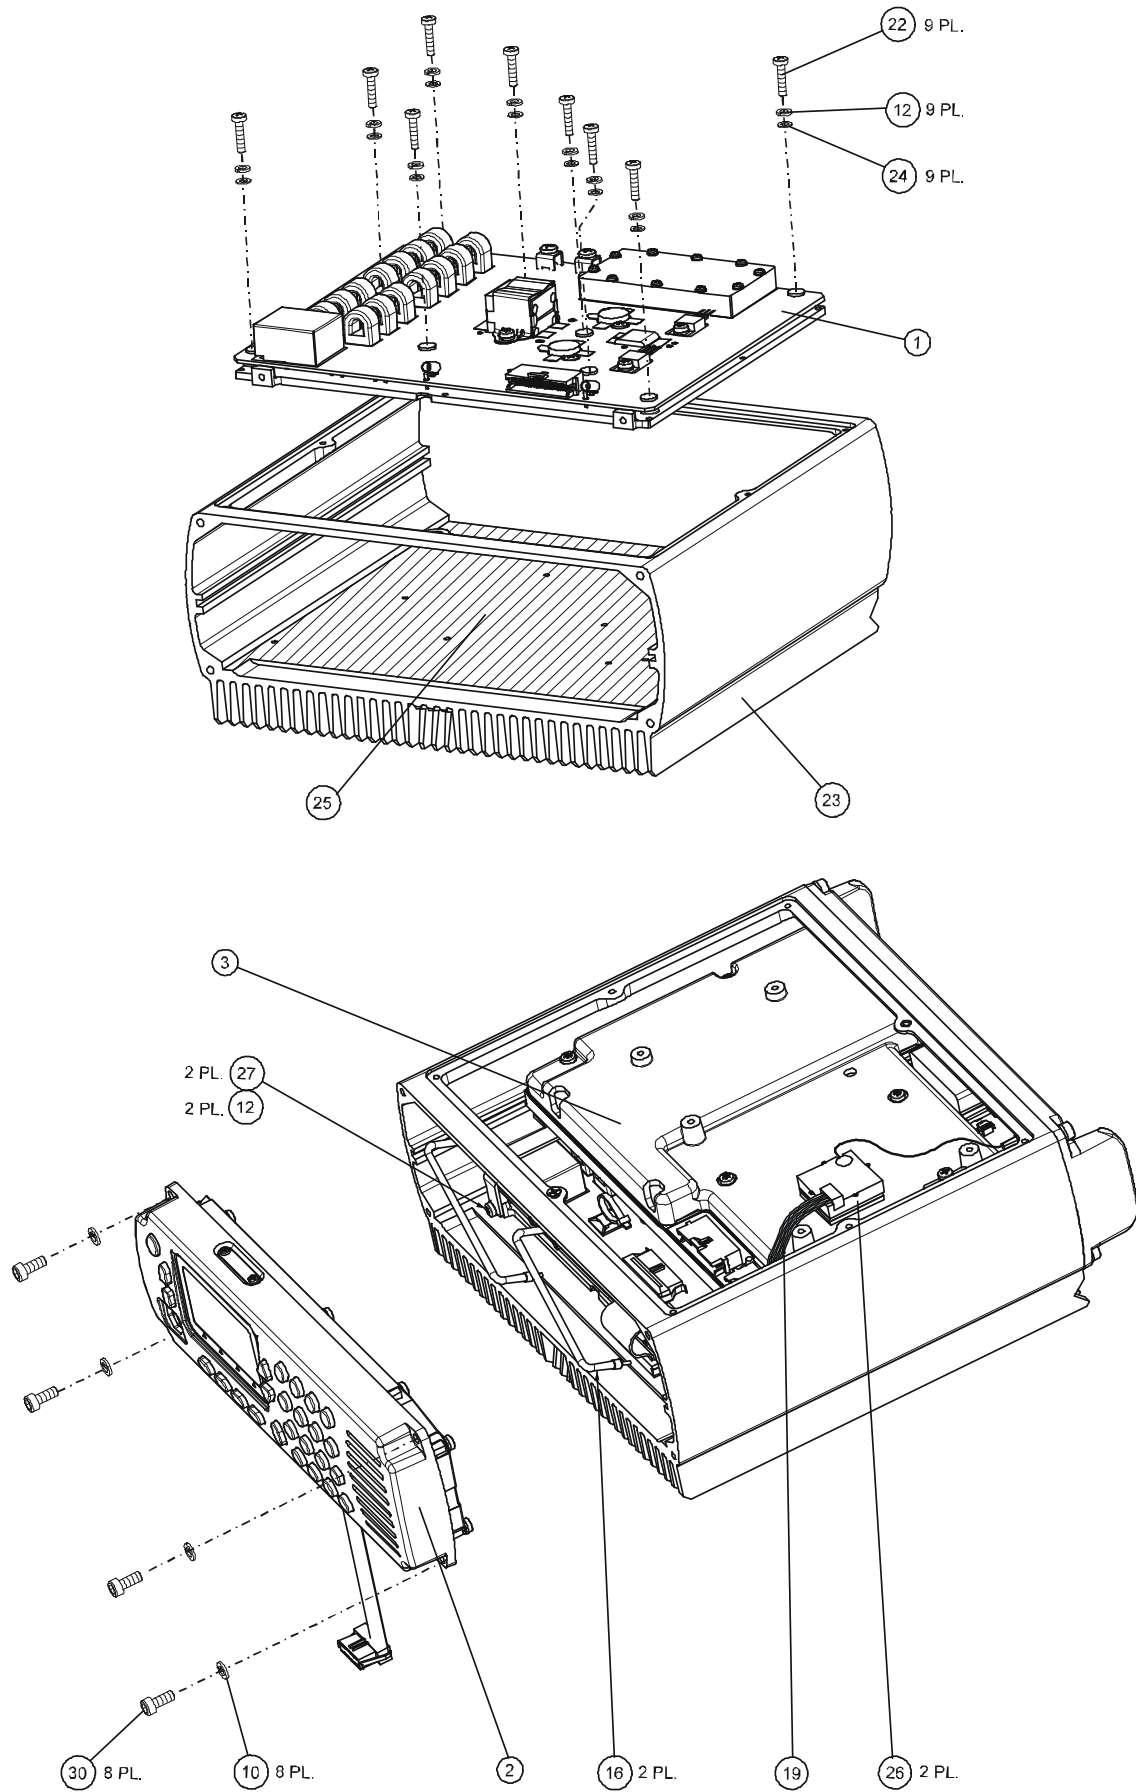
A. Micom-Z Assembly Dash Version (Sheet 1 of 2)
